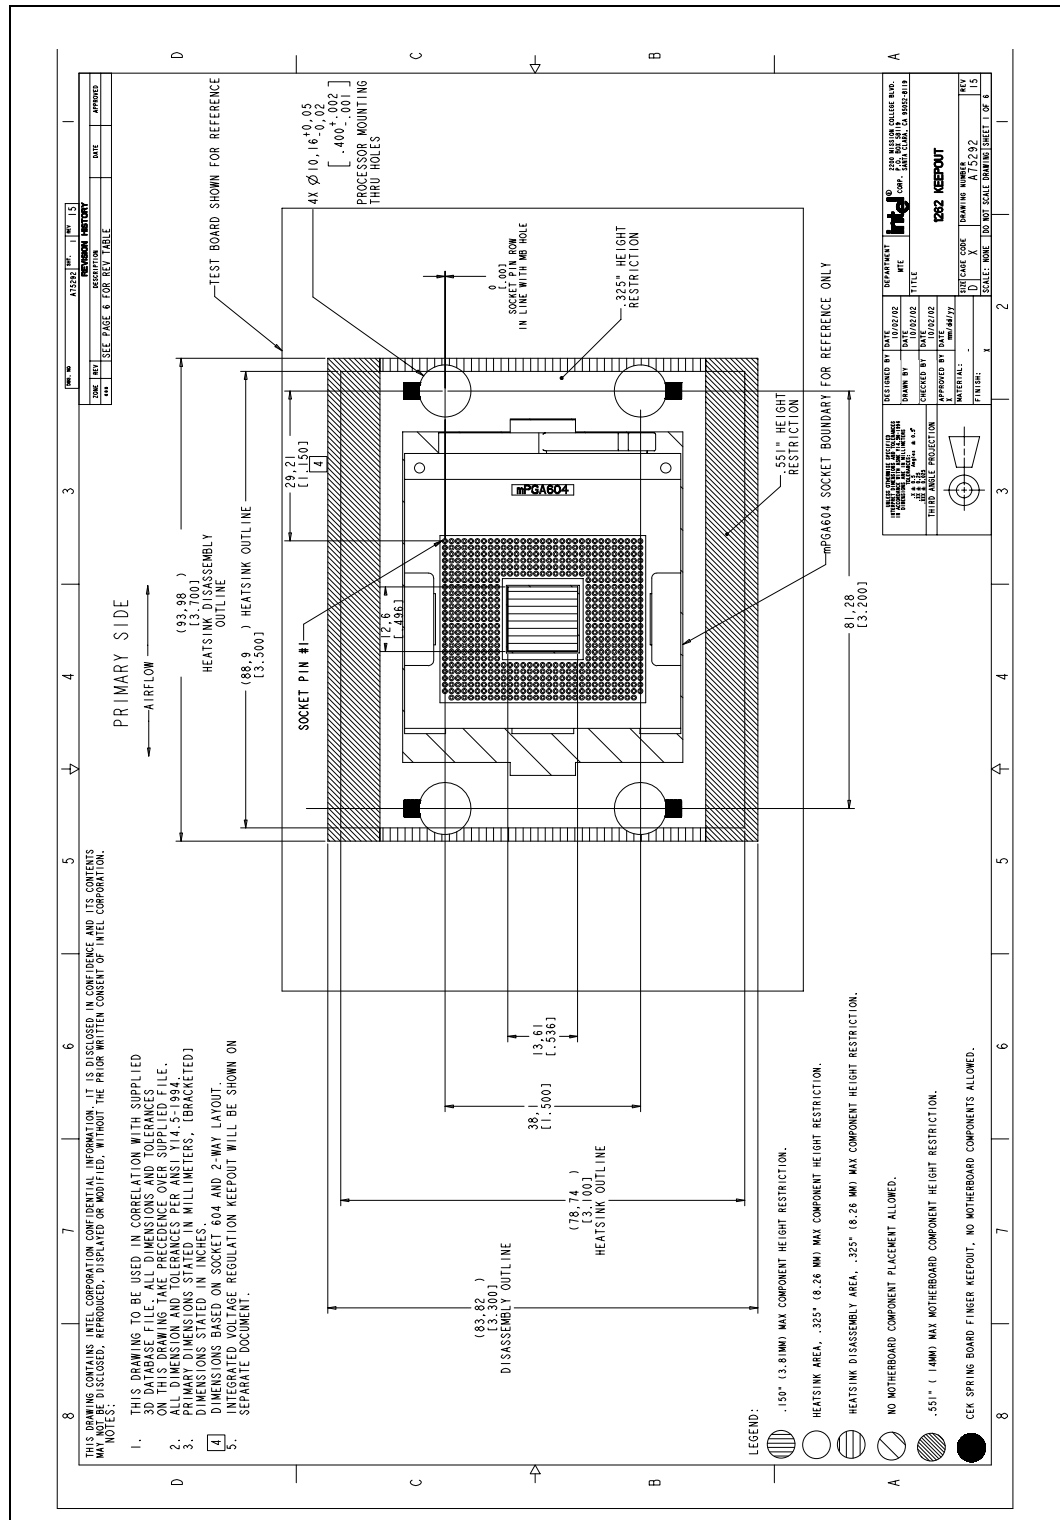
Top Side Board Keep-Out Zones (Part 2)
